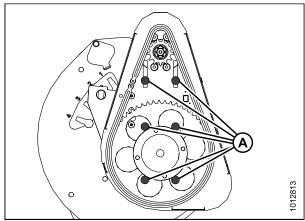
Single-Reel Drive Shown – Double Reel Similar
